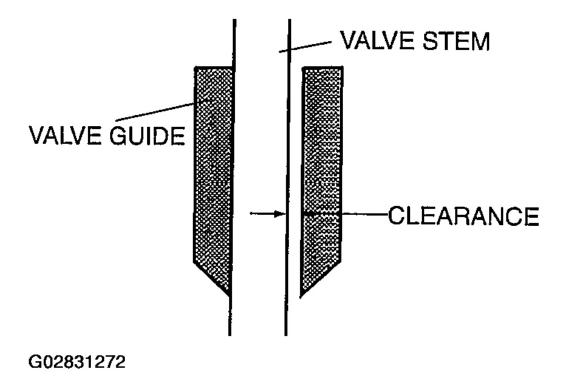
Measuring Valve Stem To Guide Clearance Courtesy of MAZDA MOTORS CORP.
